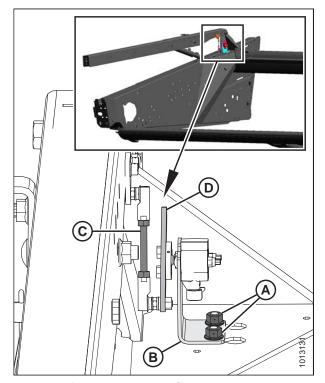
Reel Height Sensor – Right Reel Arm (Front View)
